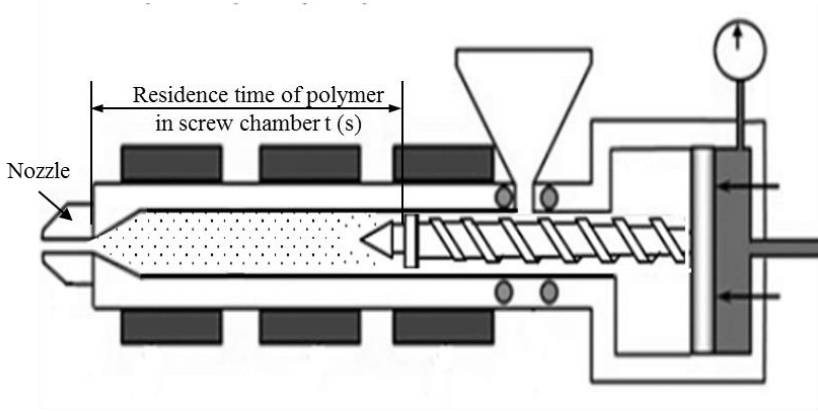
Screw chamber and nozzle of an injection molding machine
